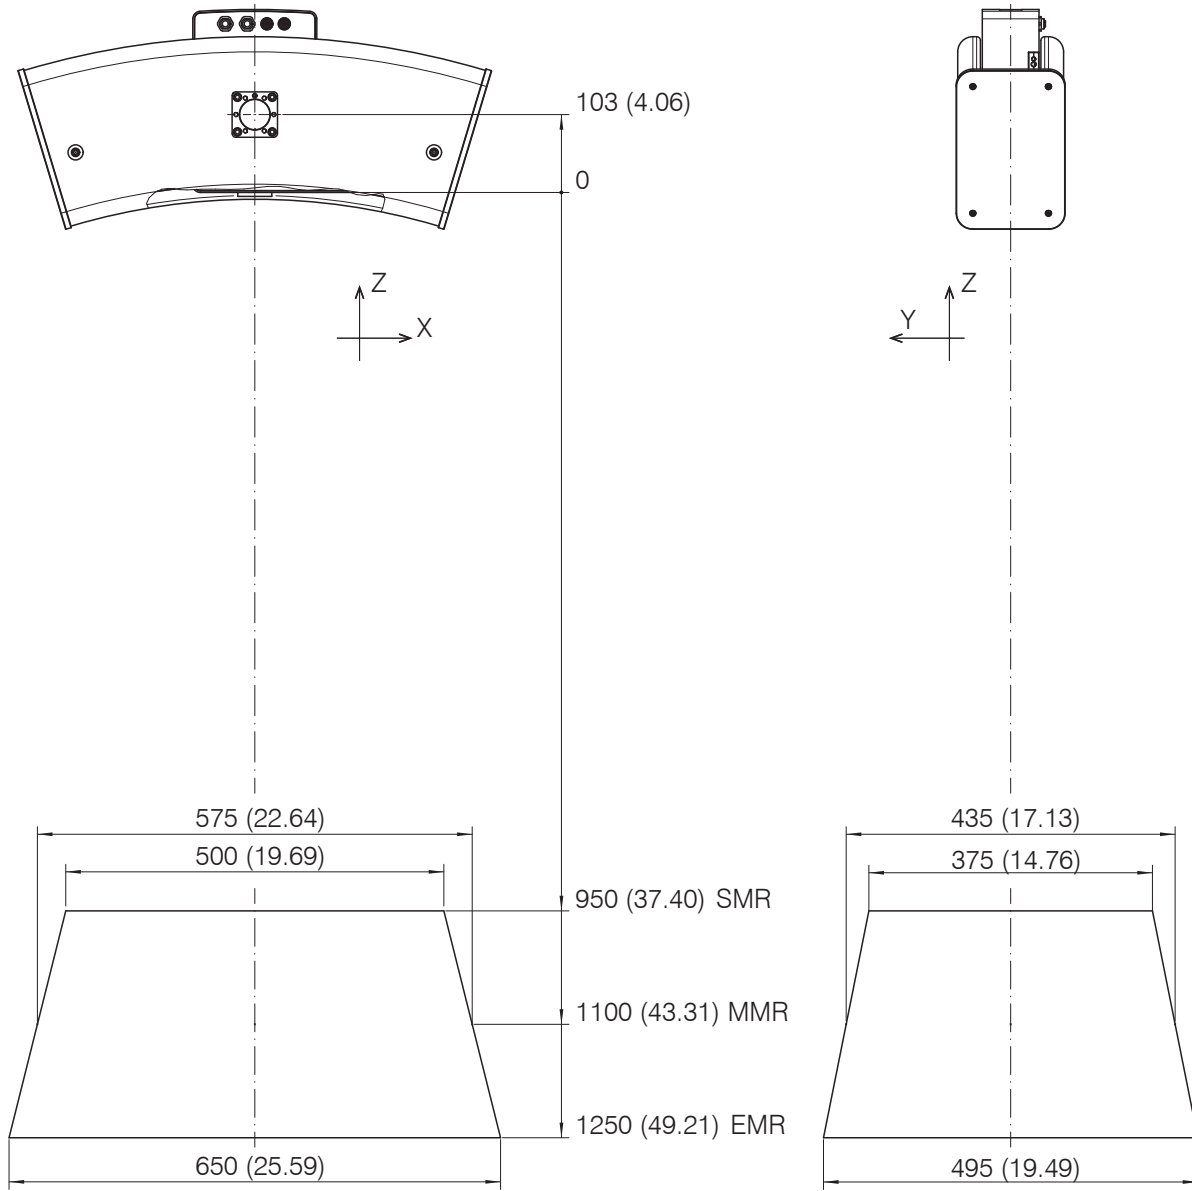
Dimensional drawing of surfaceCONTROL 3D SC25x0-575 measurement area, dimensions in mm (inches, rounded off)
